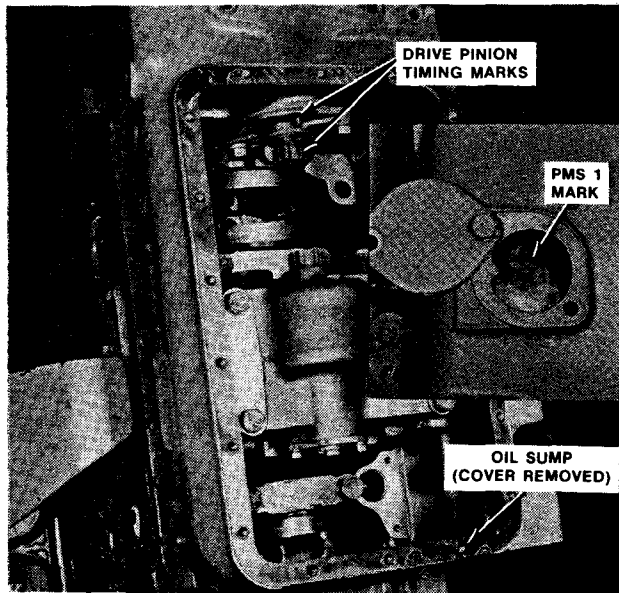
Dynamic Balancer Drive Pinion Timing Marks (SSD-437)
